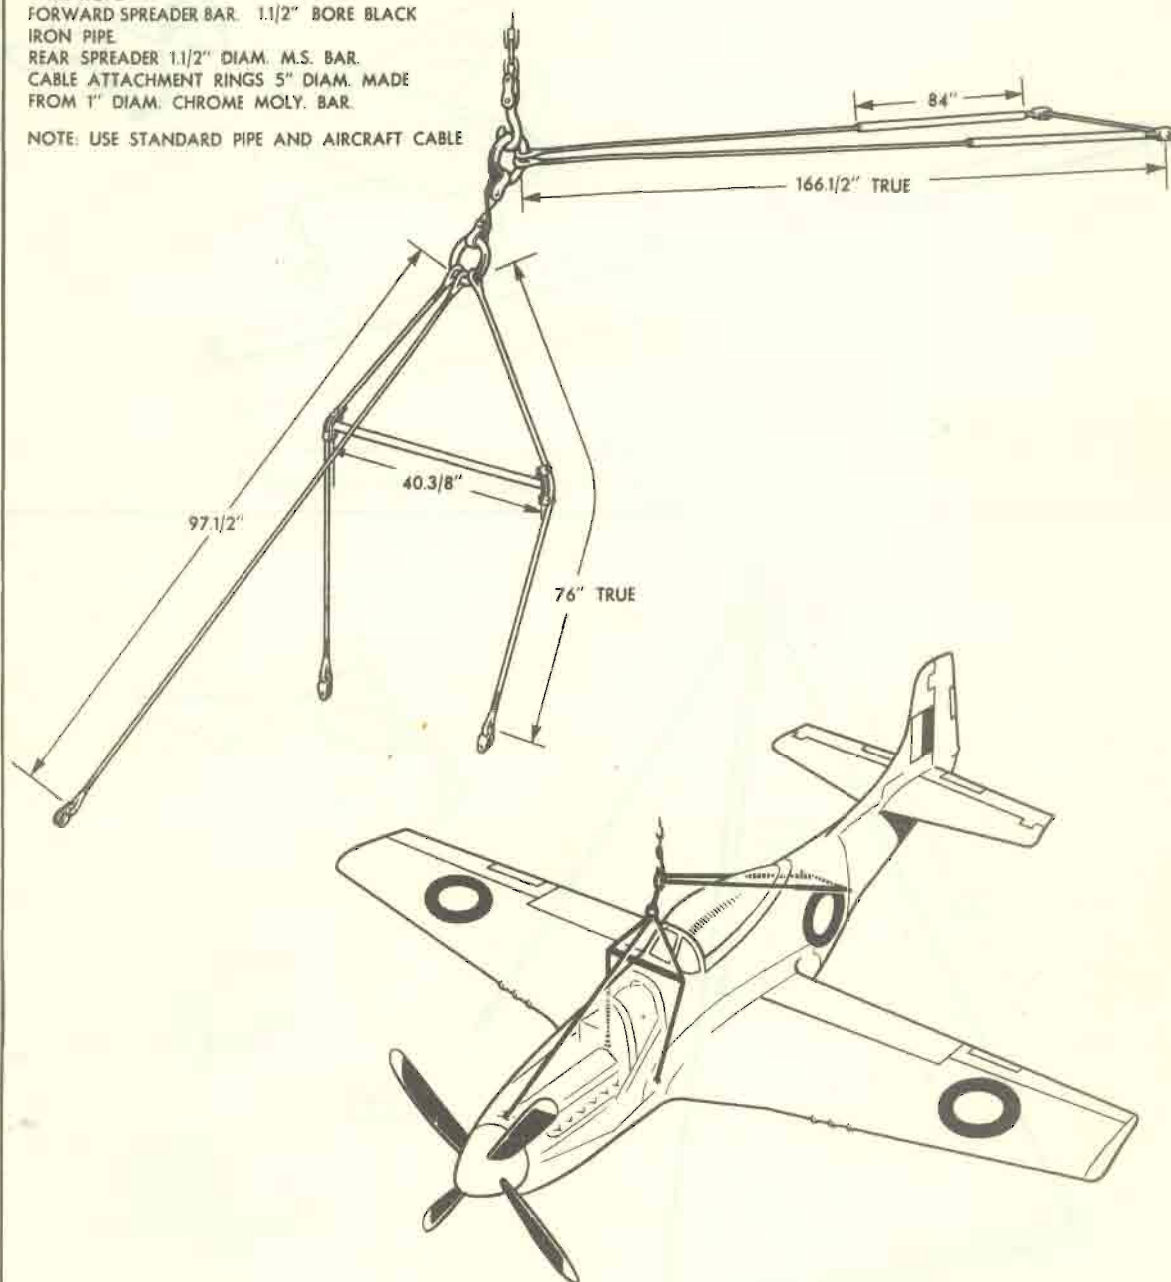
COMPLETE AIRPLANE HOISTING SLING
